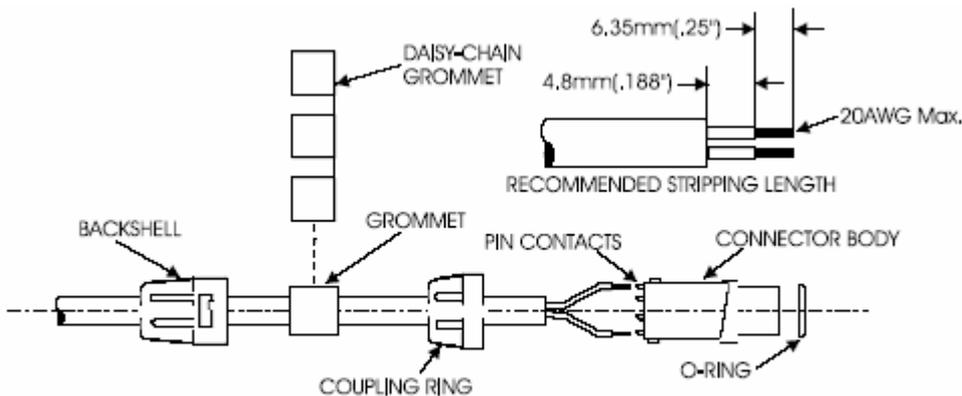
Coaxial Mini-con-x Series Cable connector Assembly
